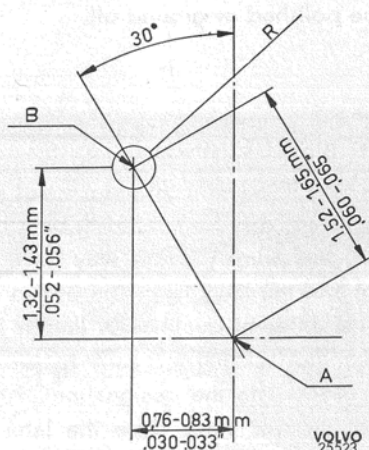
Eccentricity for rear lining (riveted type) for front wheels
